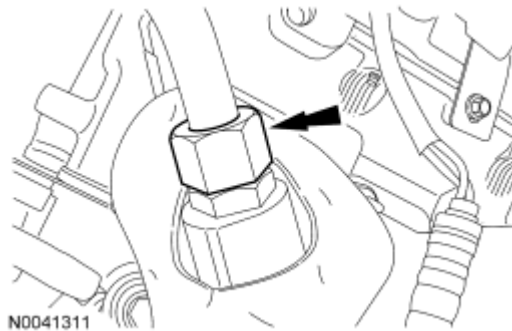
Locating EGR Tube Nut At RH Exhaust Manifold
